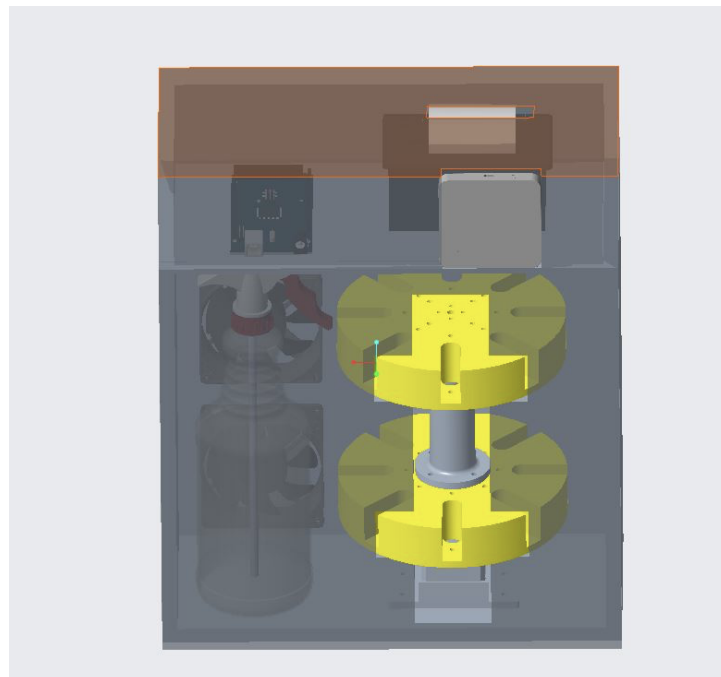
CAD assembly of Covid-19 Convenience Locker(with front cover)
